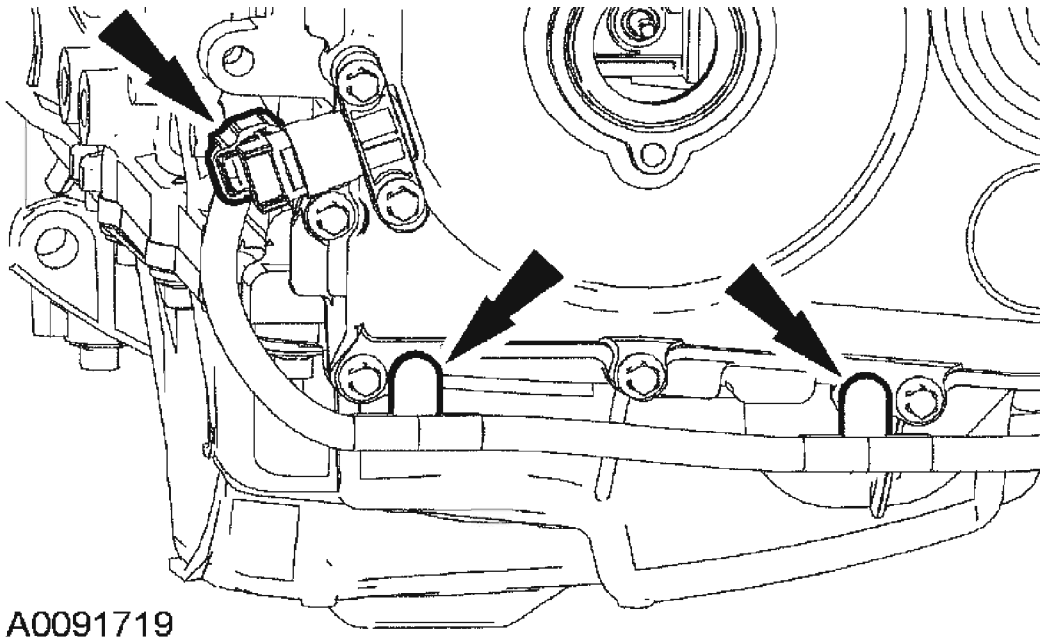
Connecting CKP Sensor Electrical Connector And Wiring Harness Pin-Type Retainers
